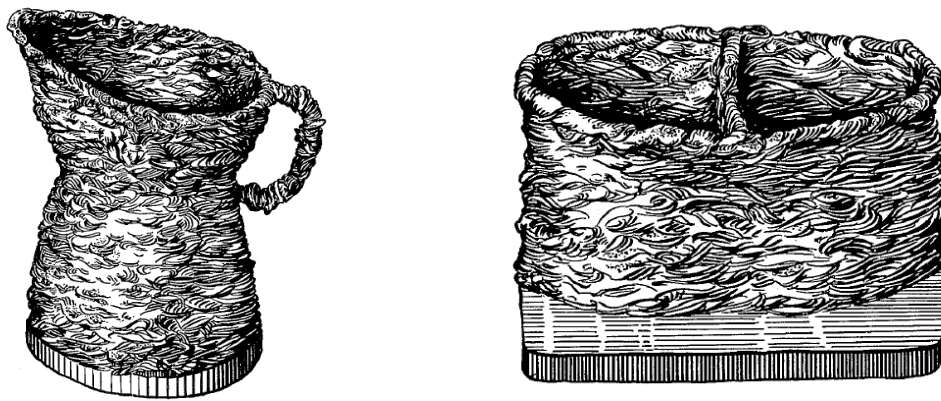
Examples of 3D weld-based components created manually in a layer-additive fashion using shielded metal arc welding (Baker, 1925).
